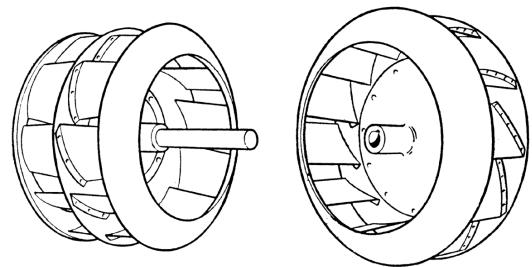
Single and Double Width Backward-Curved impellers
